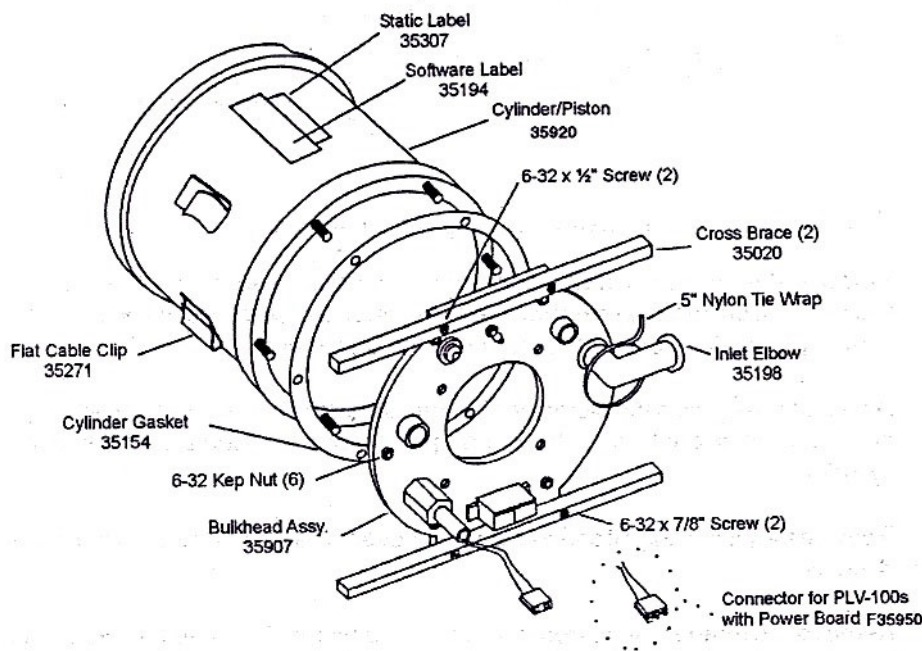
Bulkhead Piston/Cylinder Assembly
